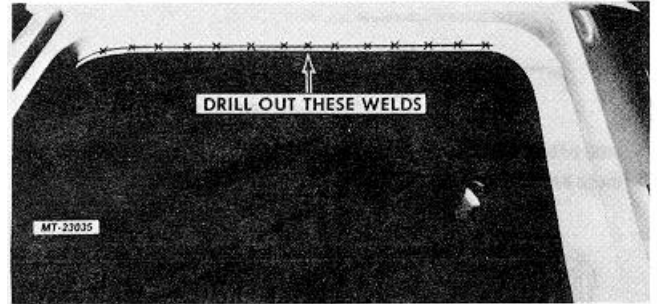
Side Panel to Roof Inner Panel Spot Welds
